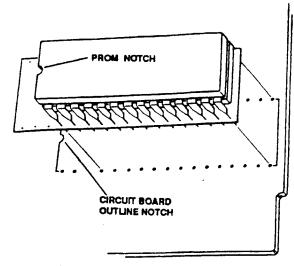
Lower the PROM straight into the socket. Be sure that all pins are in their sockets before pressing into place.
